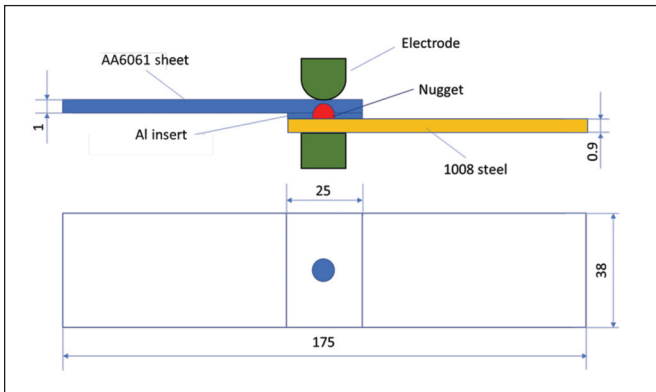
Sample geometry for lap-shear tensile testing (dimensions in mm).
